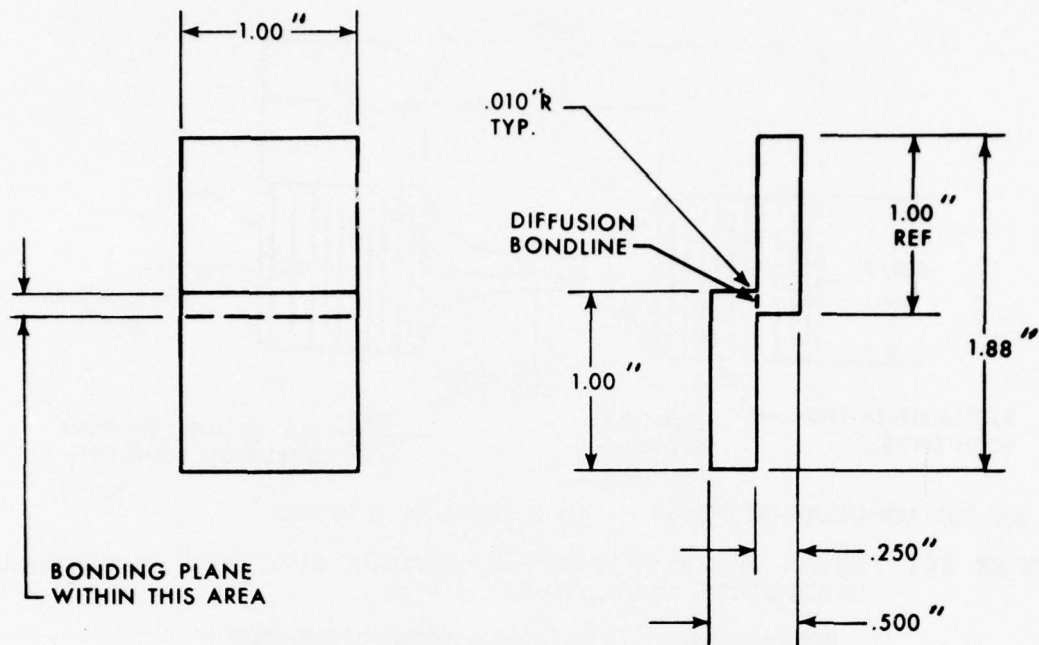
IN-LINE SHEAR TEST SPECIMEN.
